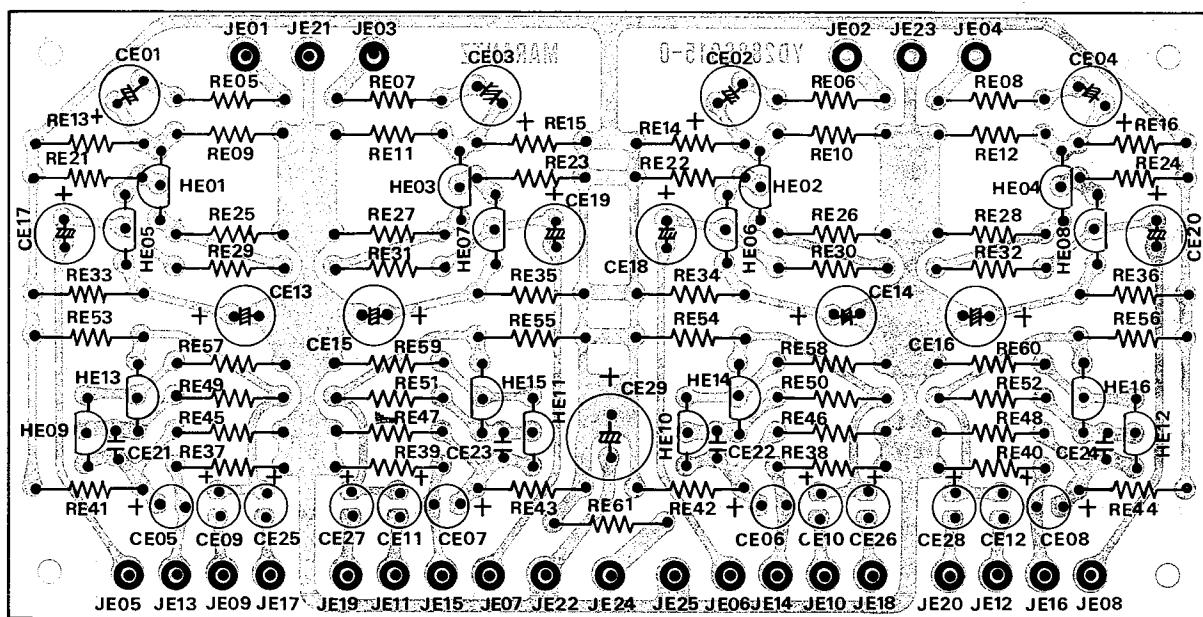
Buffer Amplifier Assembly PD01 Component Locations
